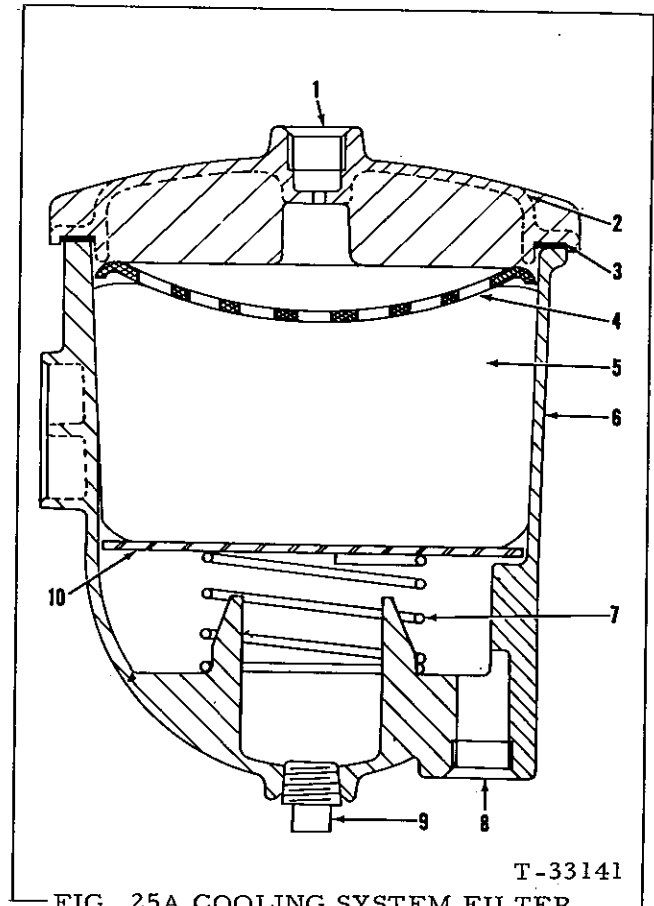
A COOLING SYSTEM FILTER - SPECIAL EQUIPMENT
